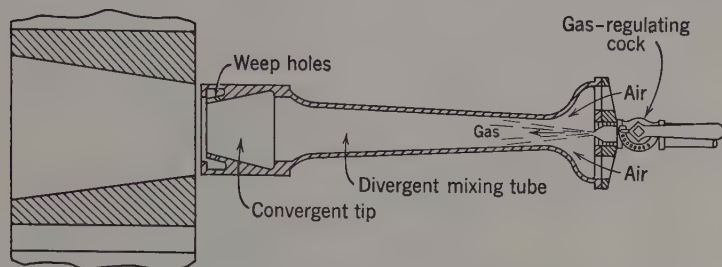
Inspirator burner with weep holes for ignition at burner.
